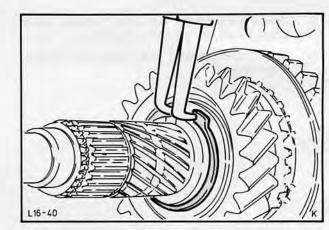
Remove circlip of 1st/2nd gear synchroniser hub
